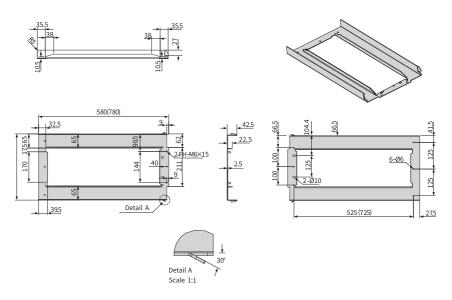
Dimensions of the bottom mounting bracket for T10 models
